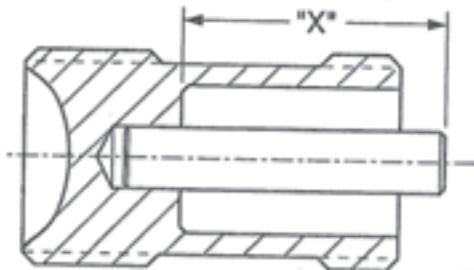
PCOR/PC Adjusting Screw Stop Pin
